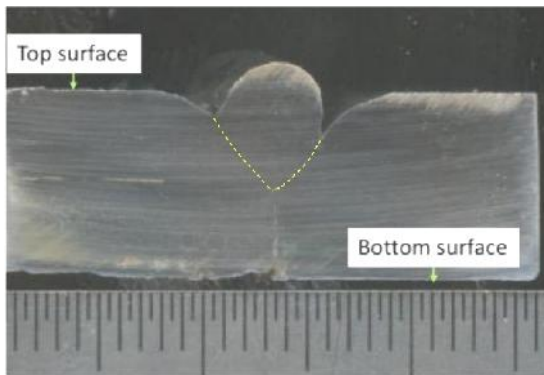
The bead cross-sections of MIG welding (Welding current: 105 A; welding voltage: 21V; wire feed rate: 240 cm/min; welding speed: 12 cm/min)
